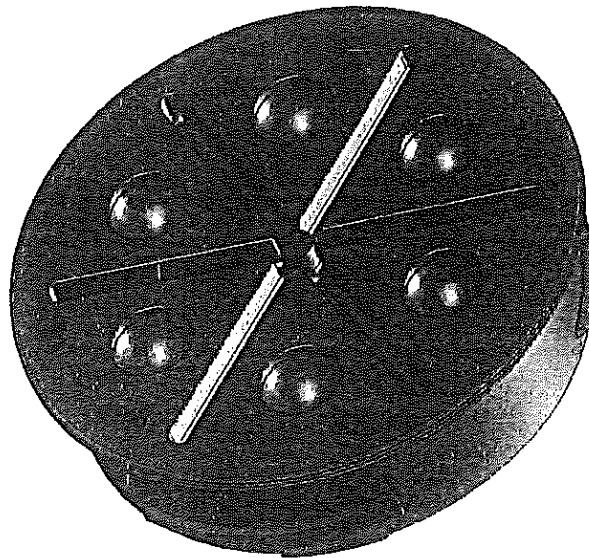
sealing cover HSI 150-D (Manufacturer drawing)
